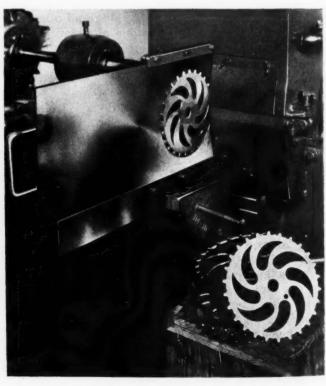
Simple "Gun Type" Sliding Fixture for Grinding Bicycle Sprockets Preparatory to Plating
